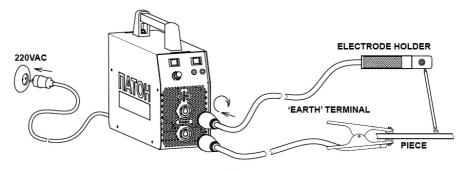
Machine connection diagram for welding with stick electrodes
